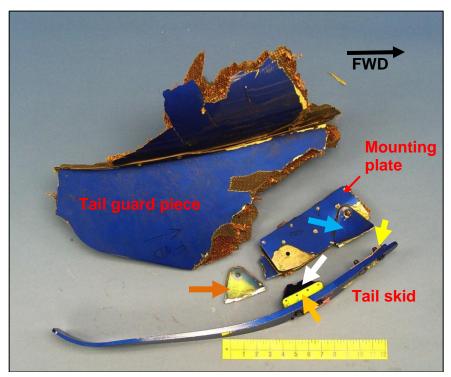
The recovered portion of the tail guard, the mounting plate assembly and the tail skid, right side.
